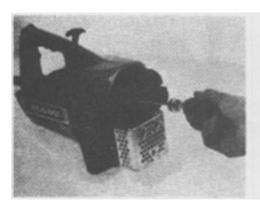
Unscrew mounting screws and remove choke cover assembly.
